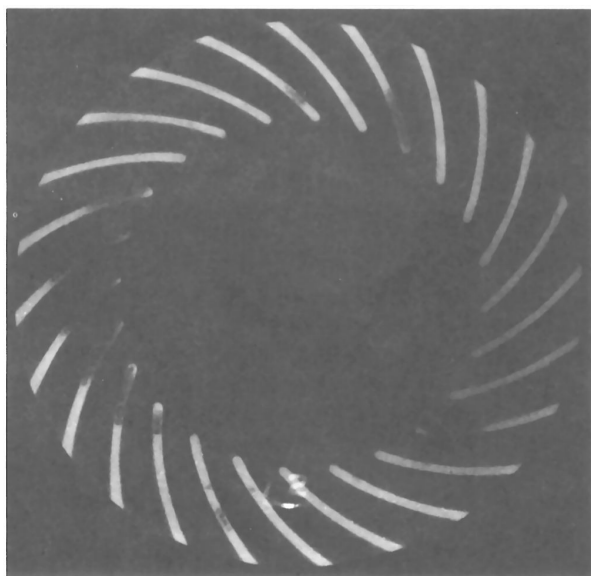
X-ray view of a poor rotor casting showing dark areas of heavy shrinkage
